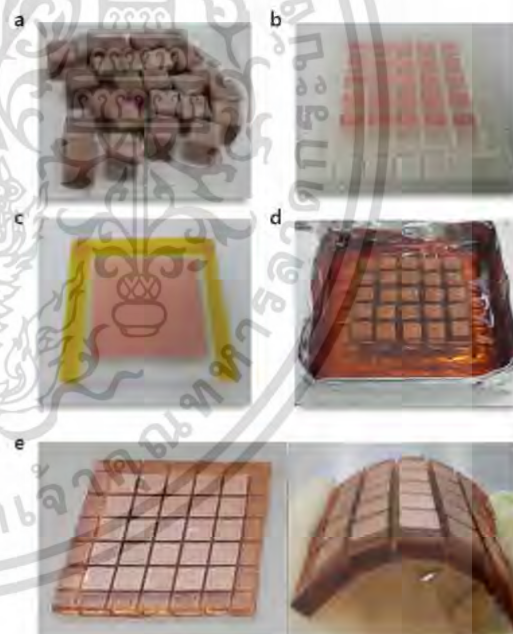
Fabrication process of the flexible heat sink. (a) Copper foam block filled with the PCM, and (b) PDMS mold for the upper side of the heatsink. Metal foil was placed over it. (c) PDMS mold for the lower side and metal foil on it. (d) PCM blocks were placed on the upper side of the mold and polyurethane elastomer was poured on it. The lower side of the mold was then placed on it. After the elastomer was cured, the upper and lower side molds were removed. (e) PCM-based flexible heatsink after all fabrication processes were complete, showing good flexibility because the elastomer bends easily.
